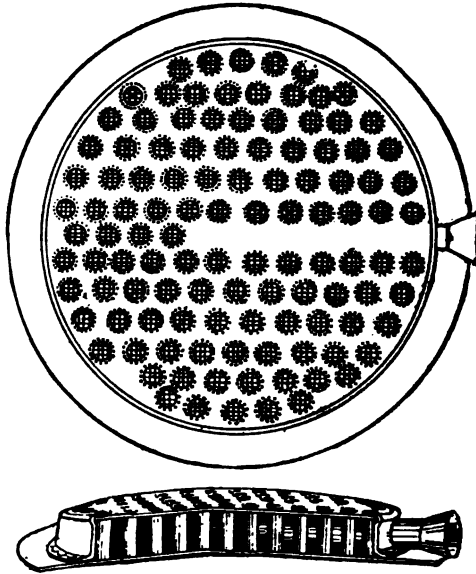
Plan and Part Section of a Typical Gasoline Burner for Steam Carriage Use.
